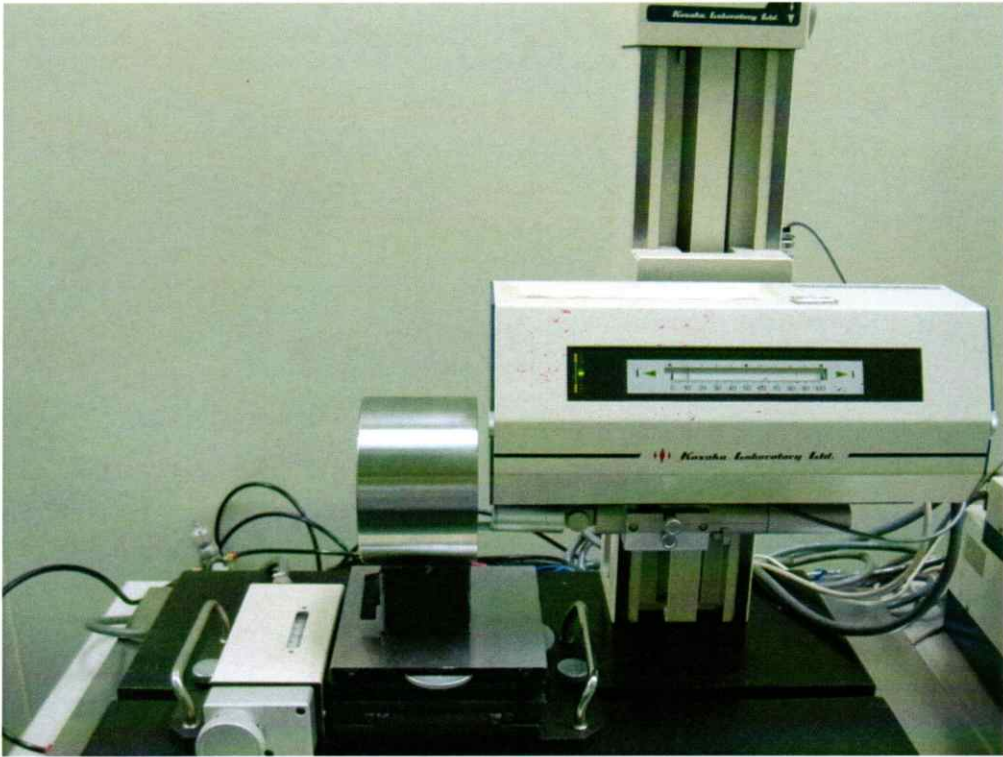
Actual measurement of surface roughness of the workpiece
